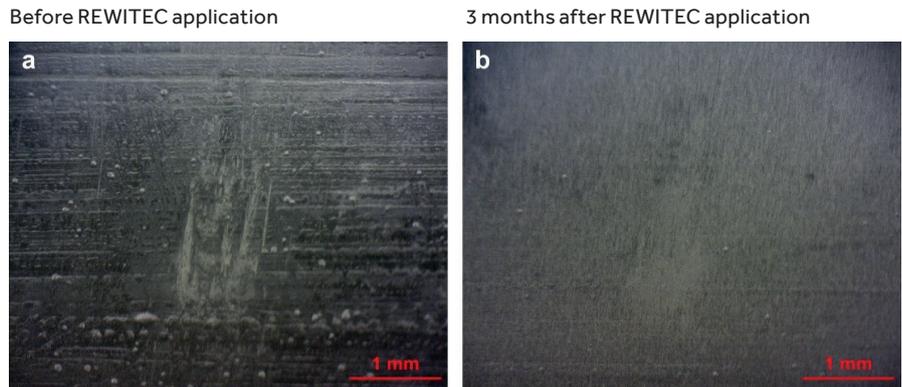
Tooth flank imprints of the high-speed shaft in a wind turbine before and 3 months after the application of REWITEC
